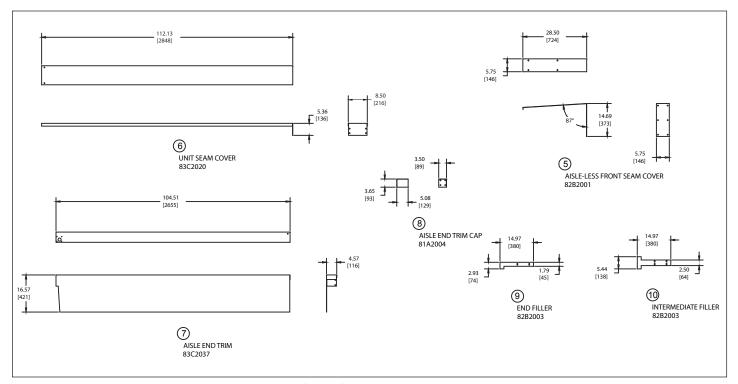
Parts With Brief Description and Dimensions (cont'd).
